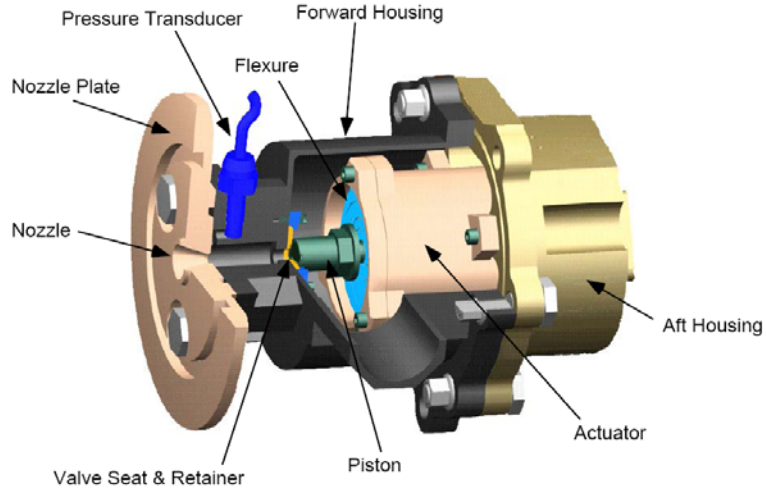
GP-B Flight Thruster, cutaway view (1 of 16 units)
